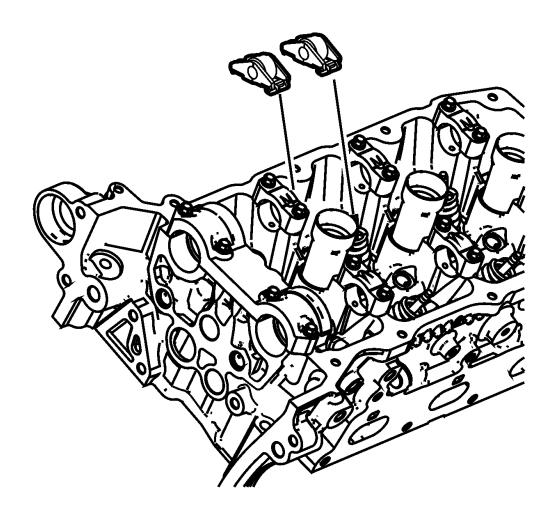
View Of Valve Rocker Arm Courtesy of GENERAL MOTORS COMPANY
